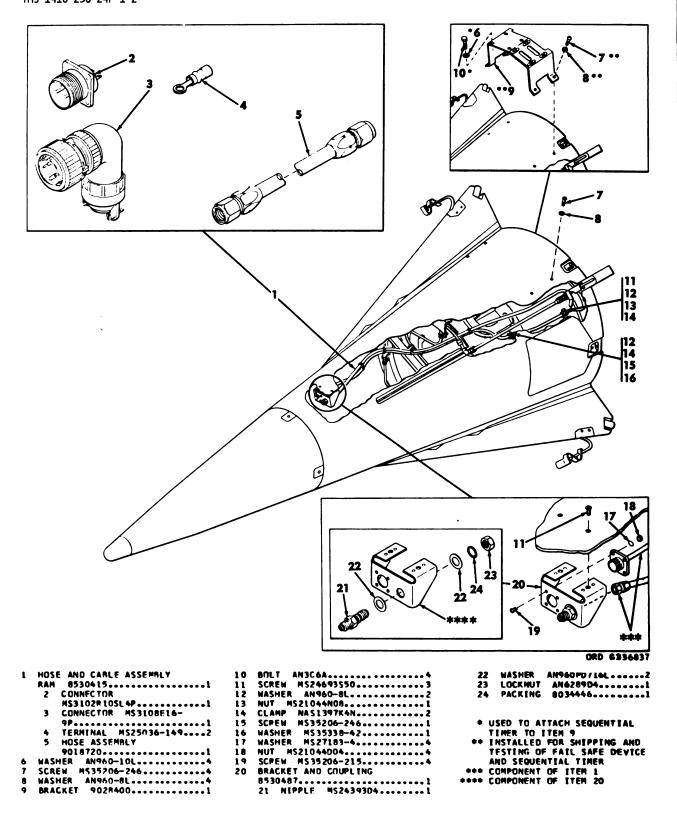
EQUIPMENT INSTALLATION, FOWARD BODY ASSEMBLY /9020575 AND 9979613/
